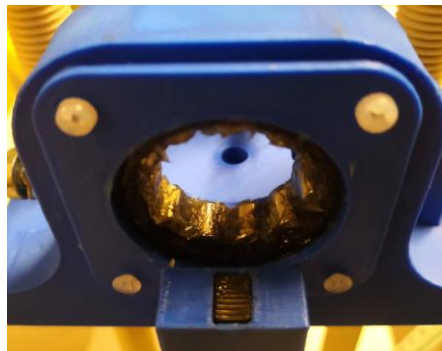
Cylindrical roller bearing (in housing) packed with extra lubrication grease.
